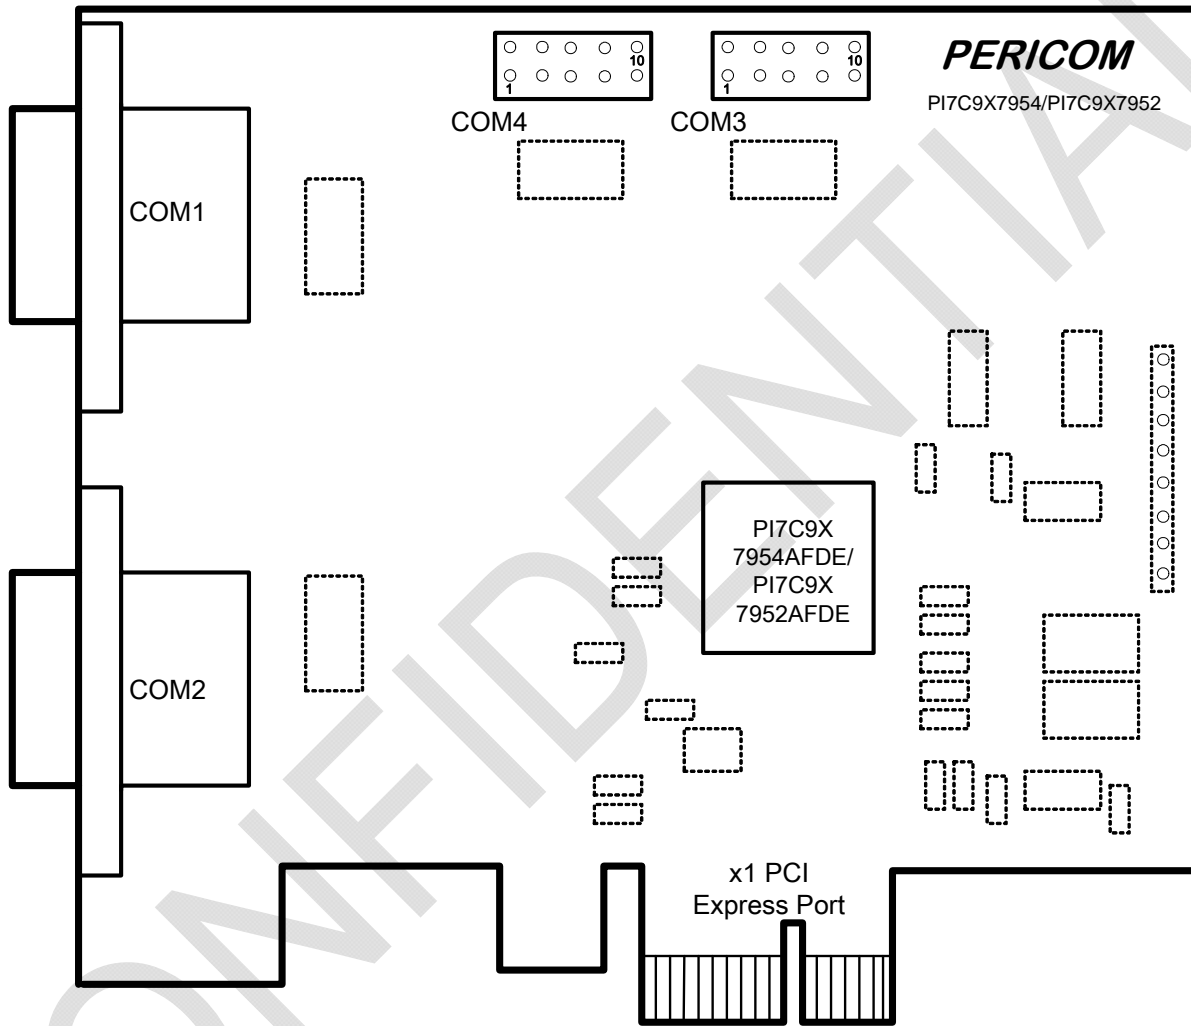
PI7C9X7954/PI7C9X7952-ie Evaluation Board Front View
